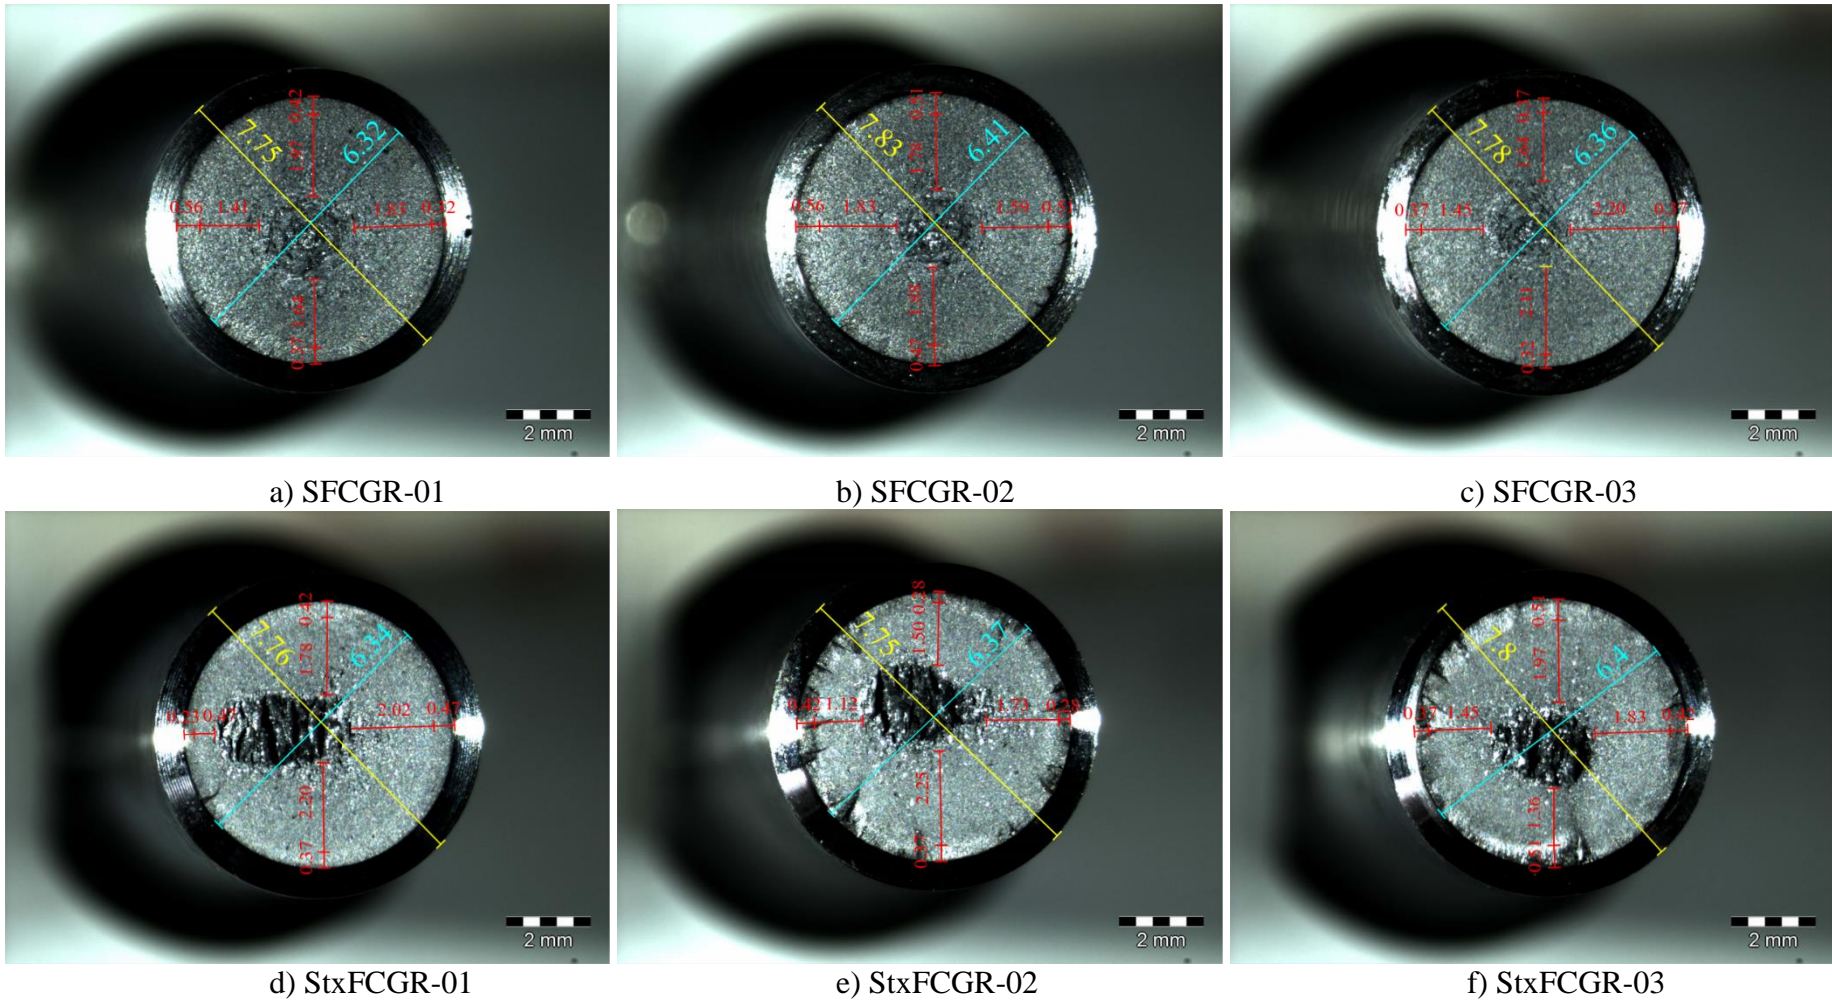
Sectional view of the fractured specimens for calculation of fatigue crack growth rate
